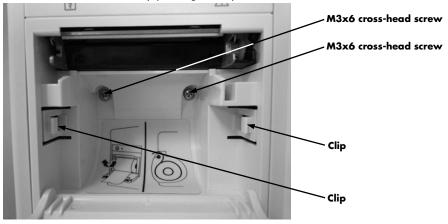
Remove two (2) M3x6 cross-head screws.
